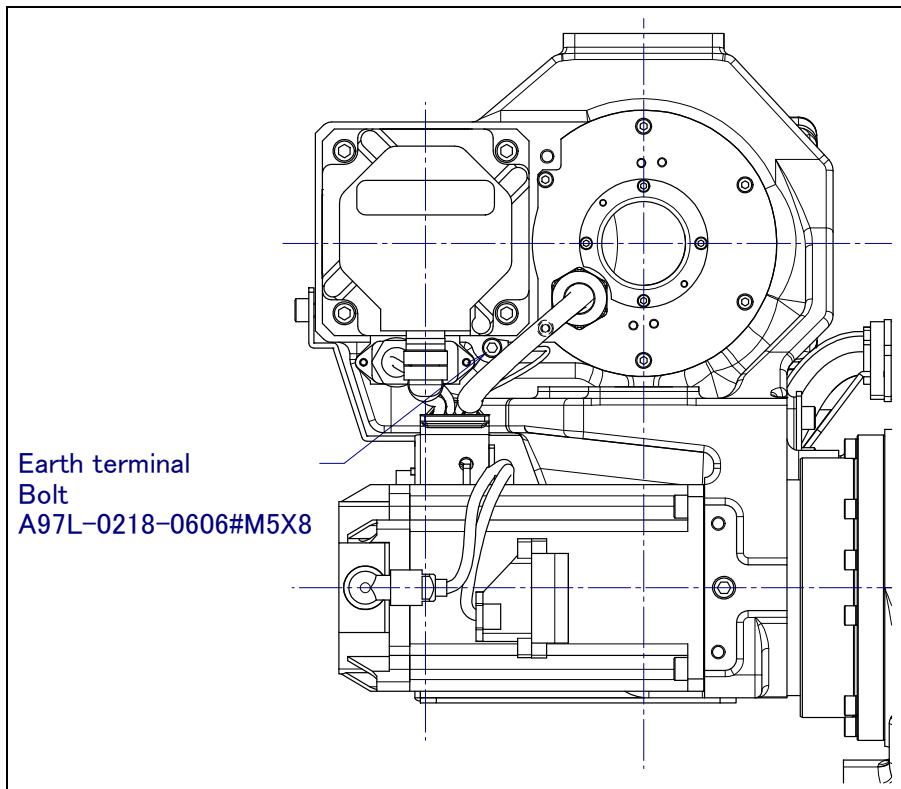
(g) Replacing cable kit (J4 connector panel part 2) (10M/10MS)
